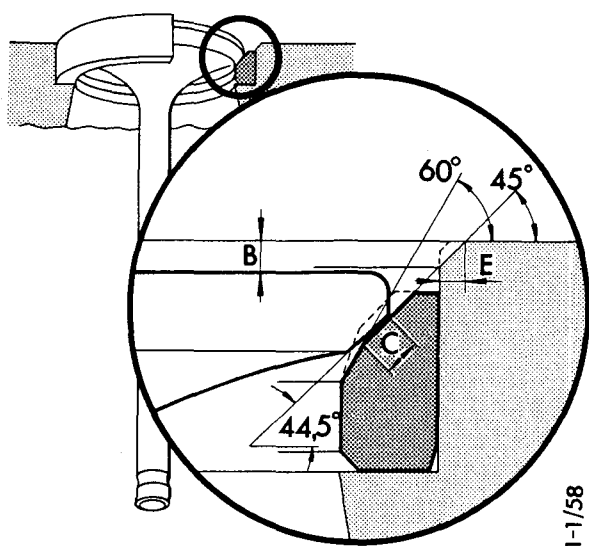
New exhaust valve and a maximally machined valve seat ring
